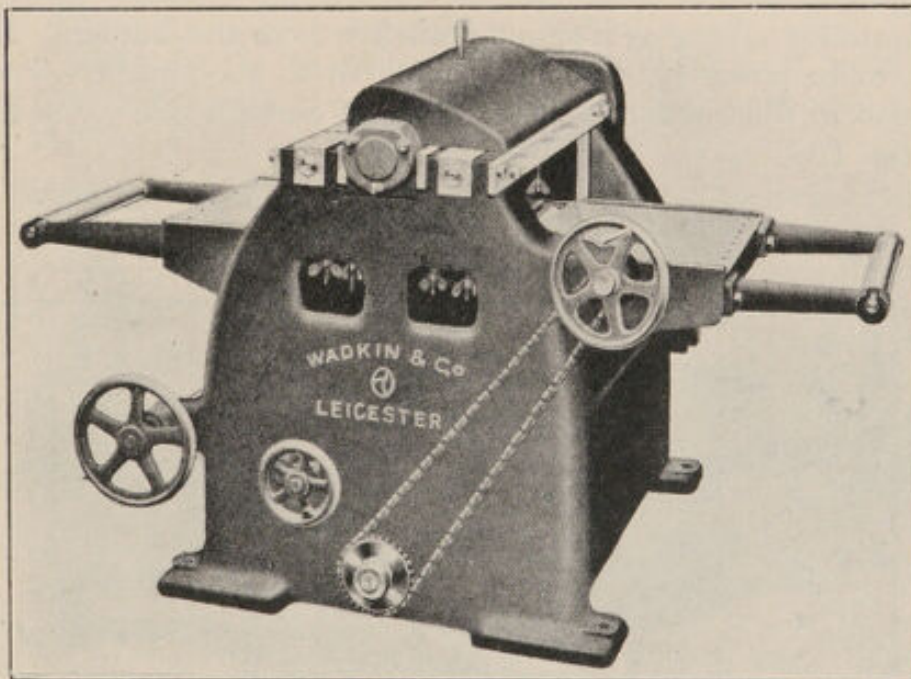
Guards for Cutter and Feed Roller of Planer.
